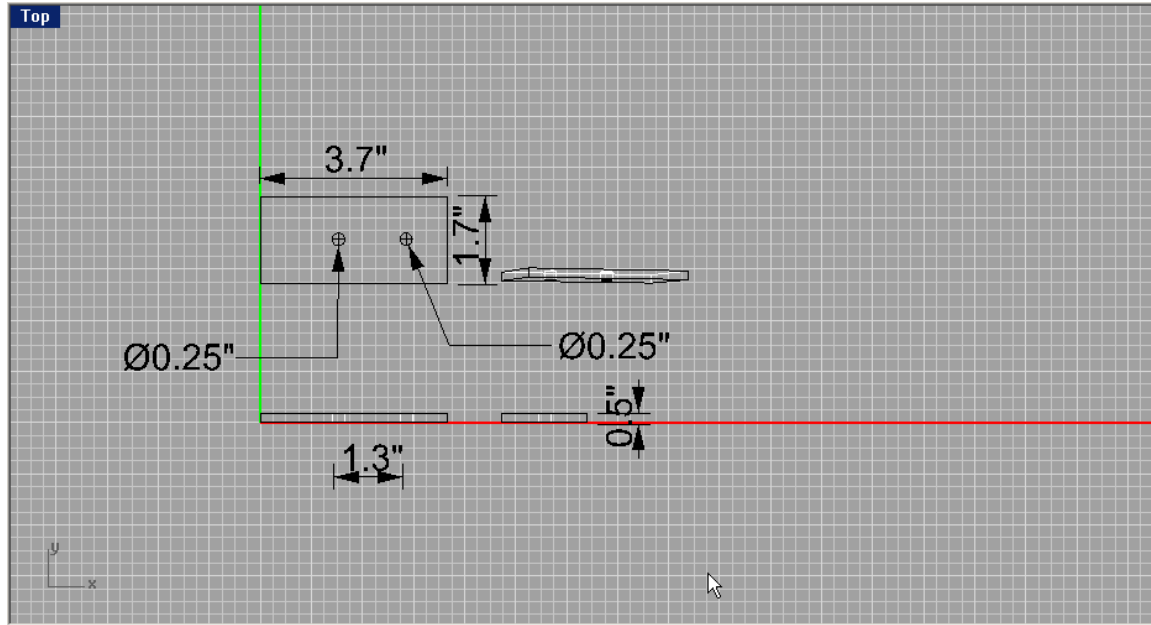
Mounting bottom plate w/ feed through hole and stationary rod hole.
